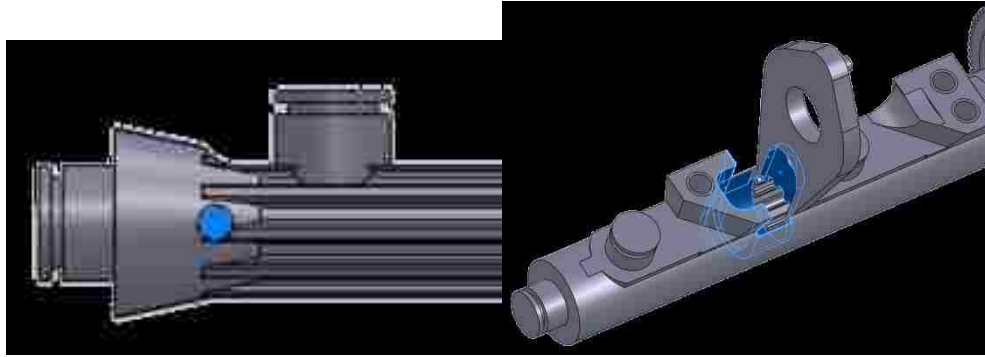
Extra holes and sections removed to ease manufacture and assembly are shown in blue.
